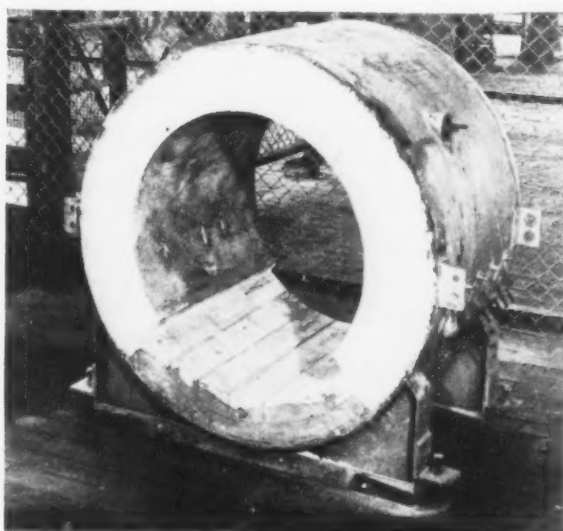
This spare furnace section lined with cast refractory material is held ready to replace any damaged section.
